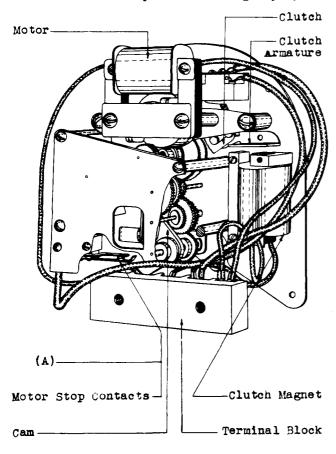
Rear View of KS-5464 Call Timing Switch
